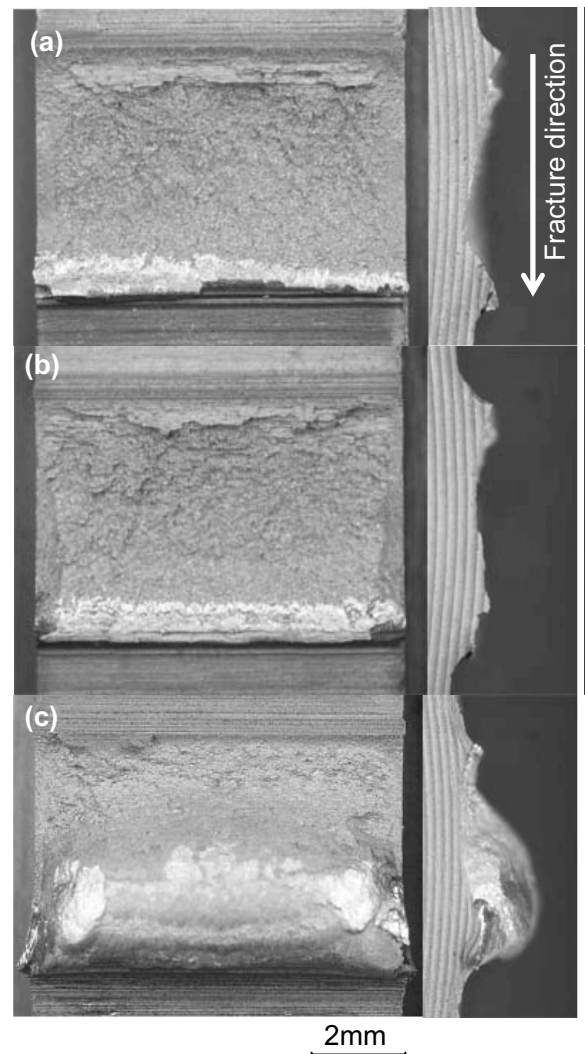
Fracture surface and edge of gear specimens. (a) No.1A, (b) No.2A, (c) No.3A
